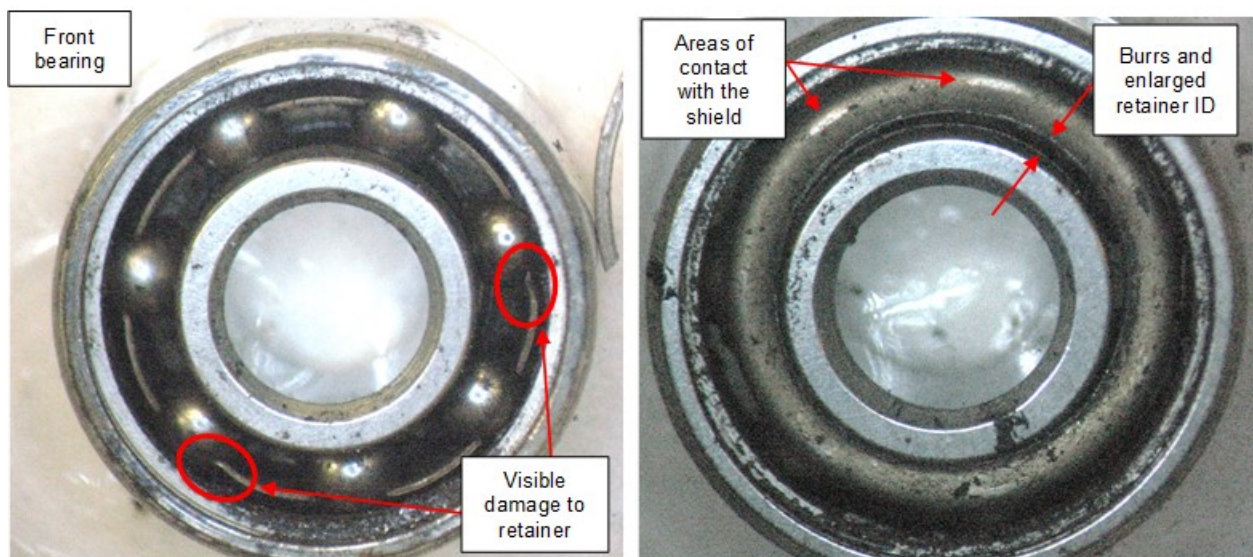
Interior Inspection and Retainer Observations on M45S Front Motor Bearing from ShEI DV Unit
